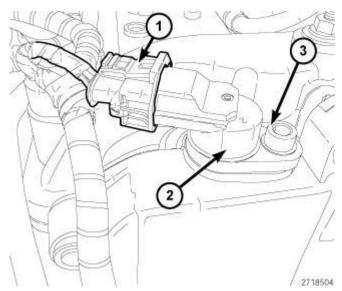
CAMSHAFT POSITION SENSOR HARNESS CONNECTOR Courtesy of CHRYSLER LLC
